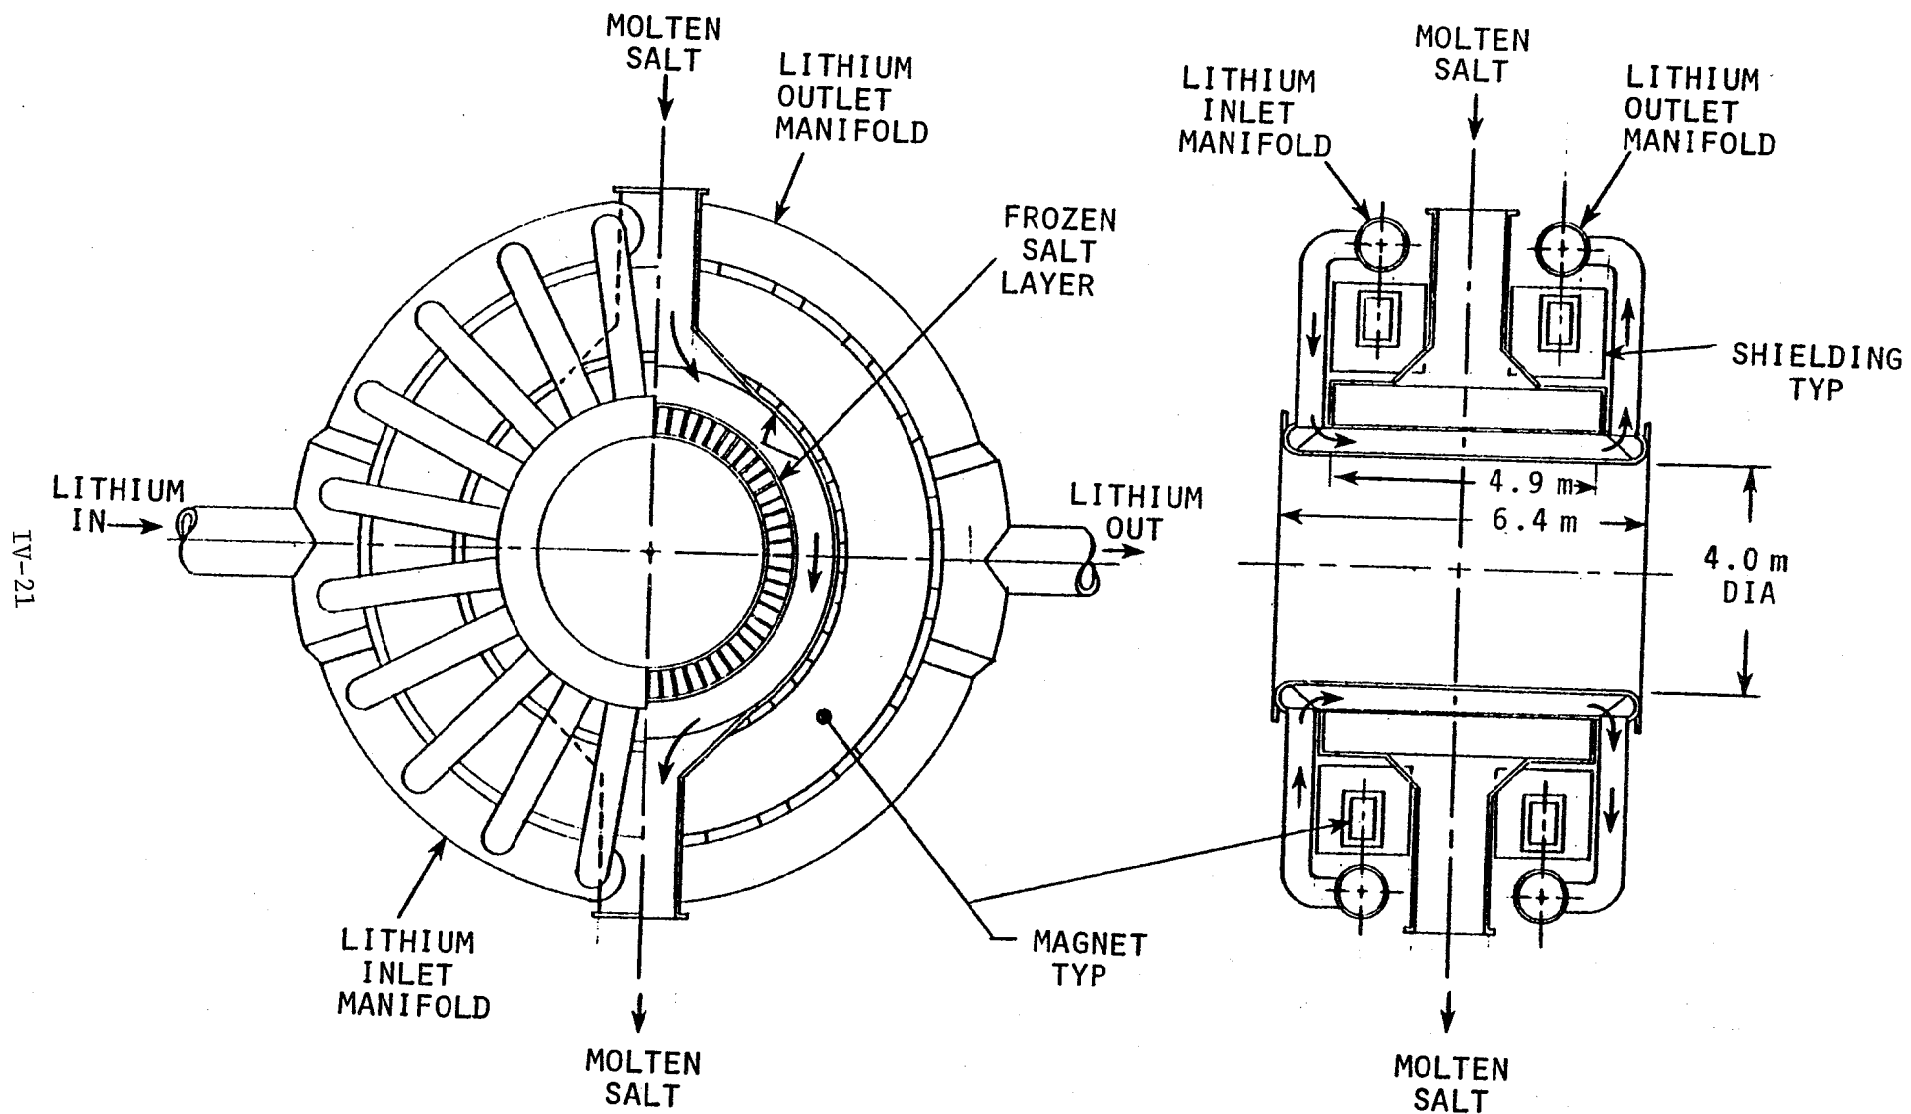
Alternate piping arrangement for the TMHR reference liquid metal cooled - molten salt blanket module concept.
